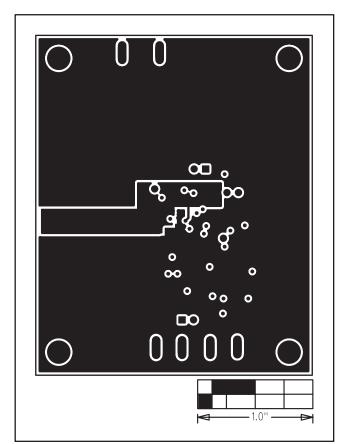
MAX16812 EV Kit PCB Layout—VCC Layer 3
